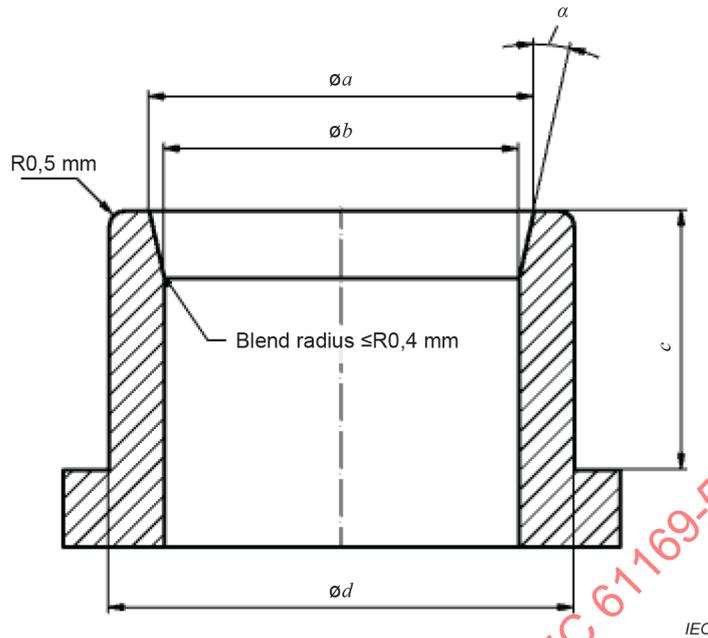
Gauge rings for socket outer contact (for dimensions see Table 4)
